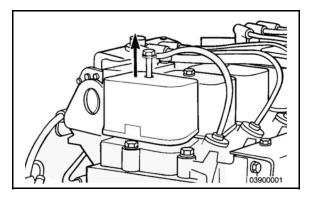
REMOVE THE ROCKER LEVER COVERS
